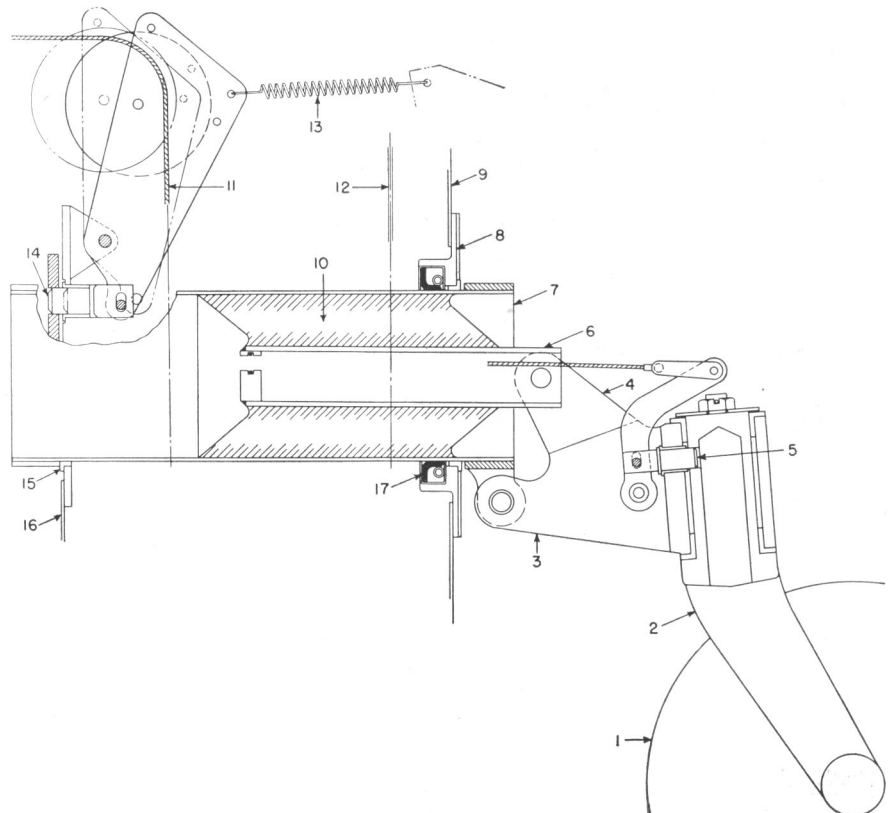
Tail gear installation: (1) wheel; (2) fork; (3) yoke lower arm; (4) yoke upper arm; (5) lockpin; (6) piston; (7) hollow retracting shaft; (8) bearing; (9) second step bulkhead; (10) rubber shock absorber secured to shaft interior and piston exterior; (11) retracting cable, wound around shaft; (12) shock cord; (13) spring; (14) down-lock pin; (15) bearing; (16) forward bulkhead support; (17) spring-loaded rubber water seal. During landing, application of the ground load to the wheel (1) causes leftward displacement of piston (6) and rubber (10), then acts in shear to absorb the force imposed. In retraction cable (11) rotates shaft (7) to nest the wheel alongside the stern.
